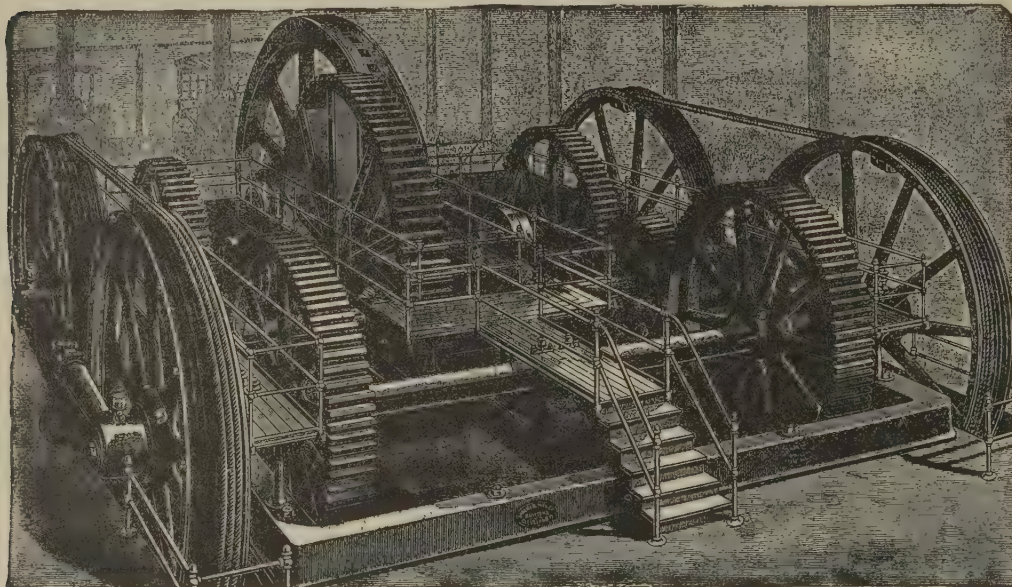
ROPE WINDING DRUMS, INTERMEDIATE GEARING AND DIFFERENTIAL RINGS.
